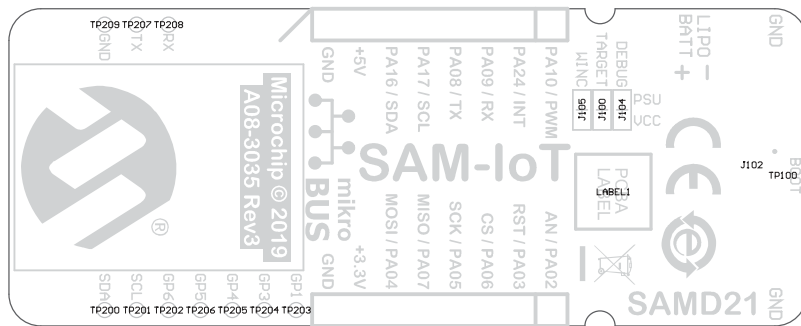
SAM-IoT Wx Development Board Assembly Drawing Bottom
